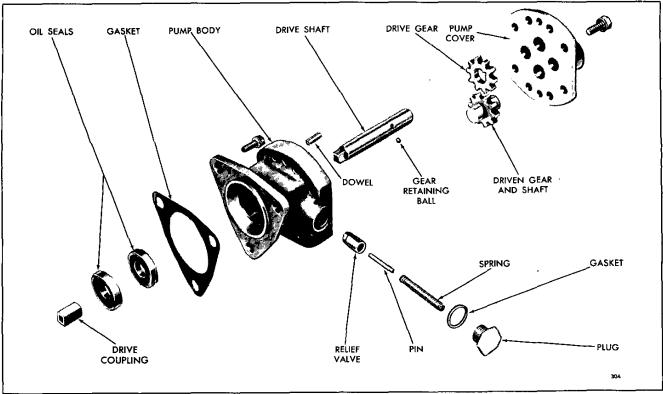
Fuel Pump Details and Relative Location of Parts (Right Hand Pump Shown)
